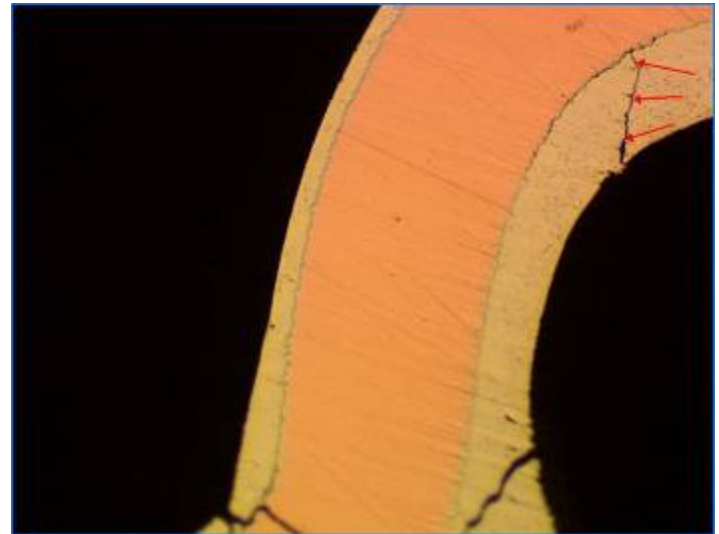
cross section, SN63, U41, left lead crack, 200xc
